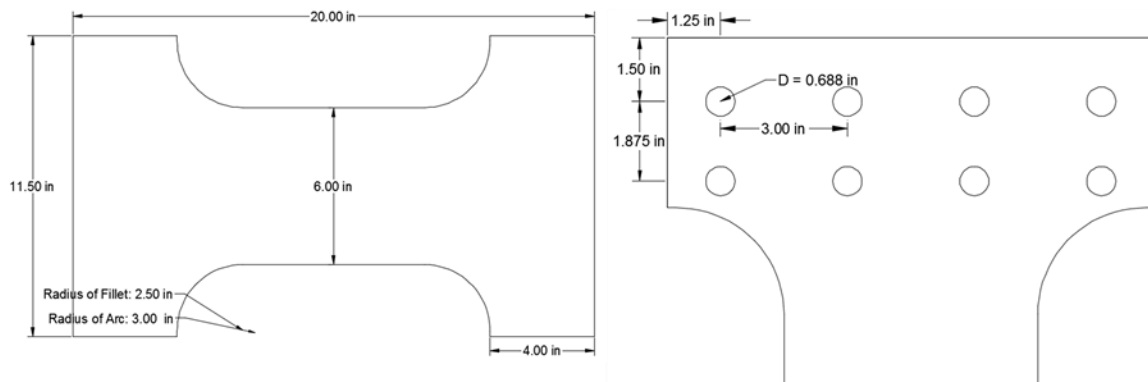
Overall dimensions of the non-load carrying fillet welded connection along with the edge and spacing distances for the proposed bolt pattern.
